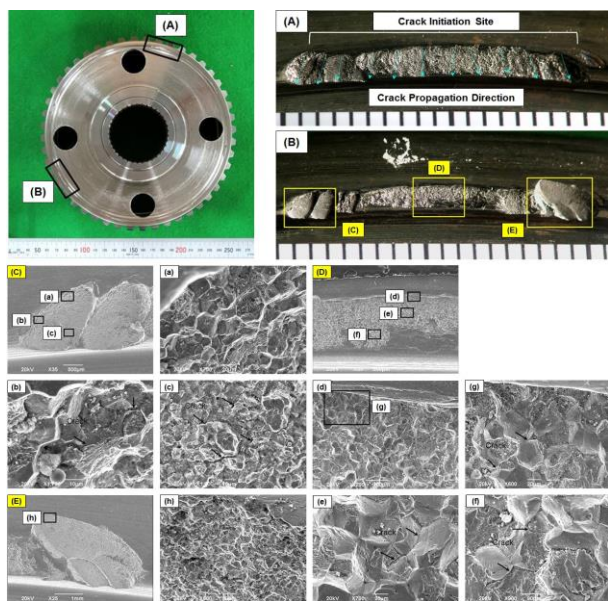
Macroscopic and microscopic observation of the fractured surfaces of the destroyed hub assembly in the range pack of the transmission
